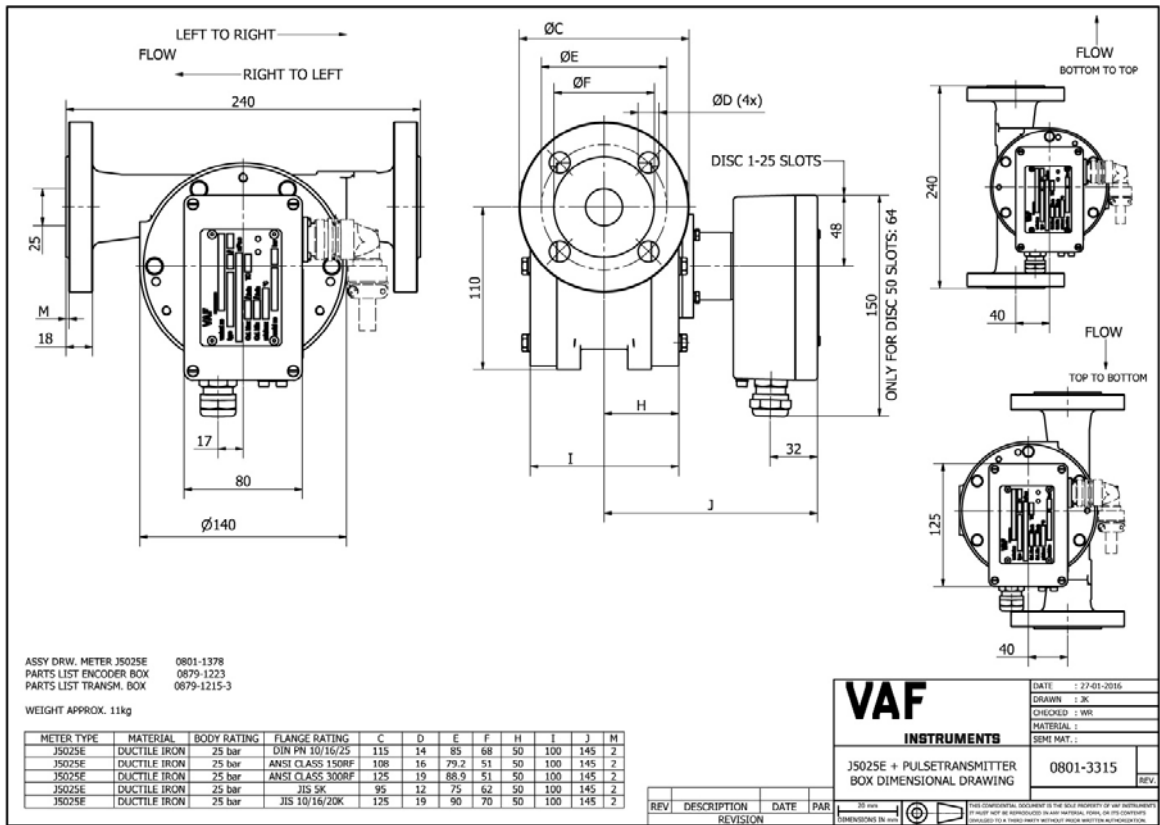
Drawing 0801-3315 – Dimensional drawing J5025E Pulse transmitter box
